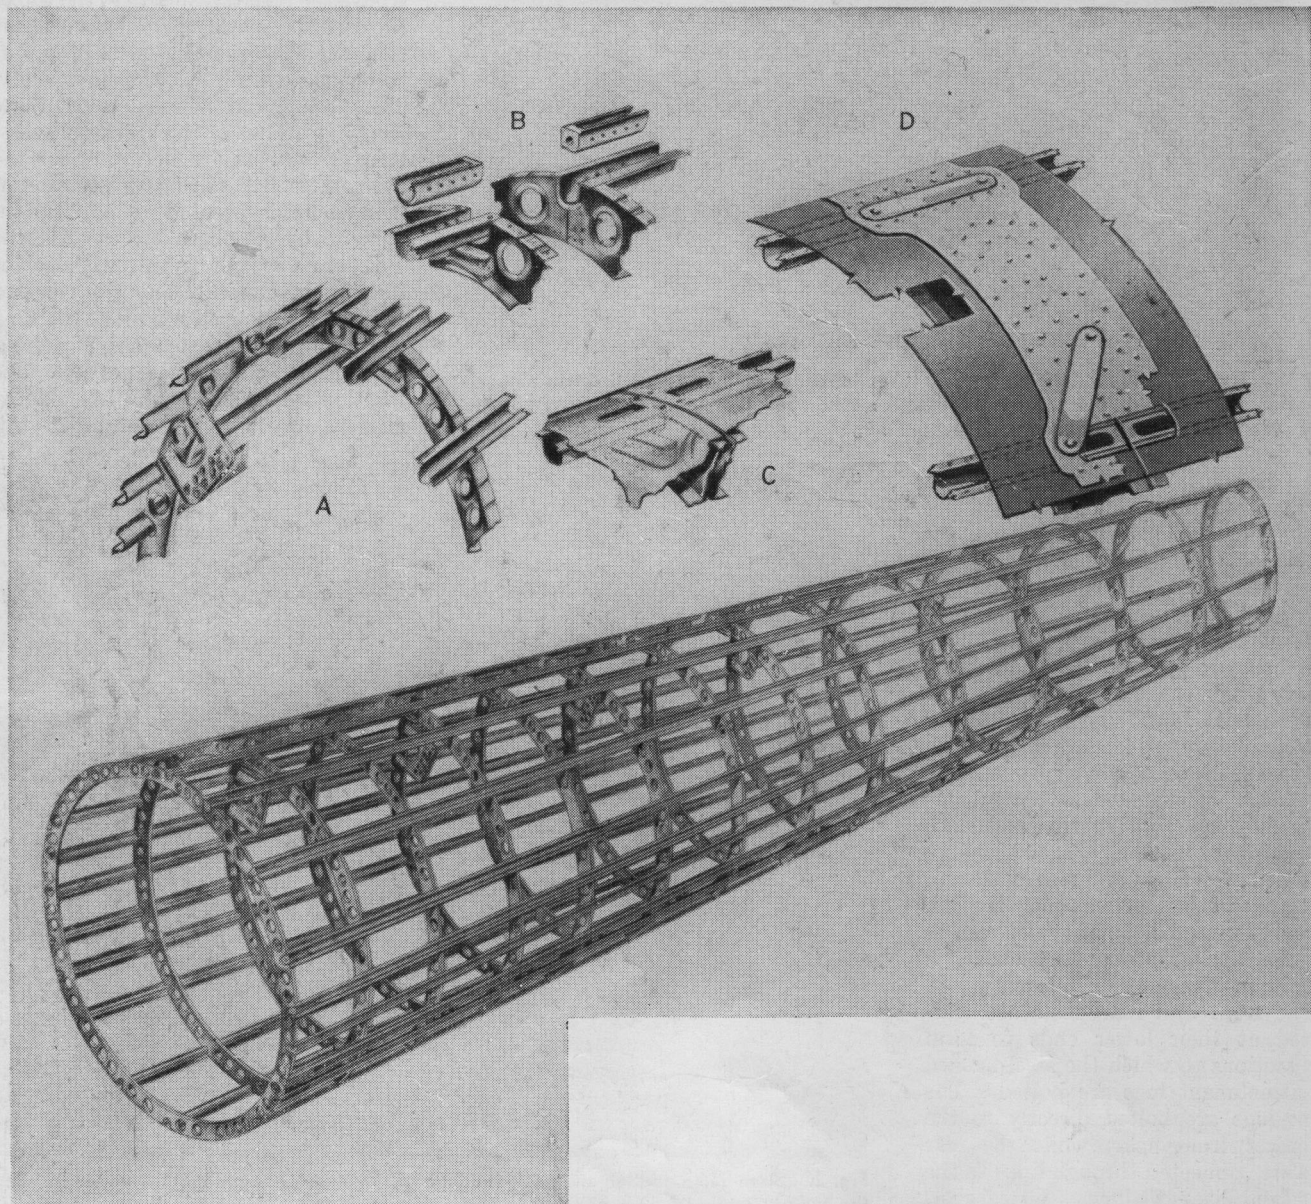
Forward boom structure: (A) fairlead bracket support; (B) forward boom-to-aft boom attachment; (C) skin attachment at boom junction; (D) junction attachment cover strip having a cover plate for tension bolt inspection.
